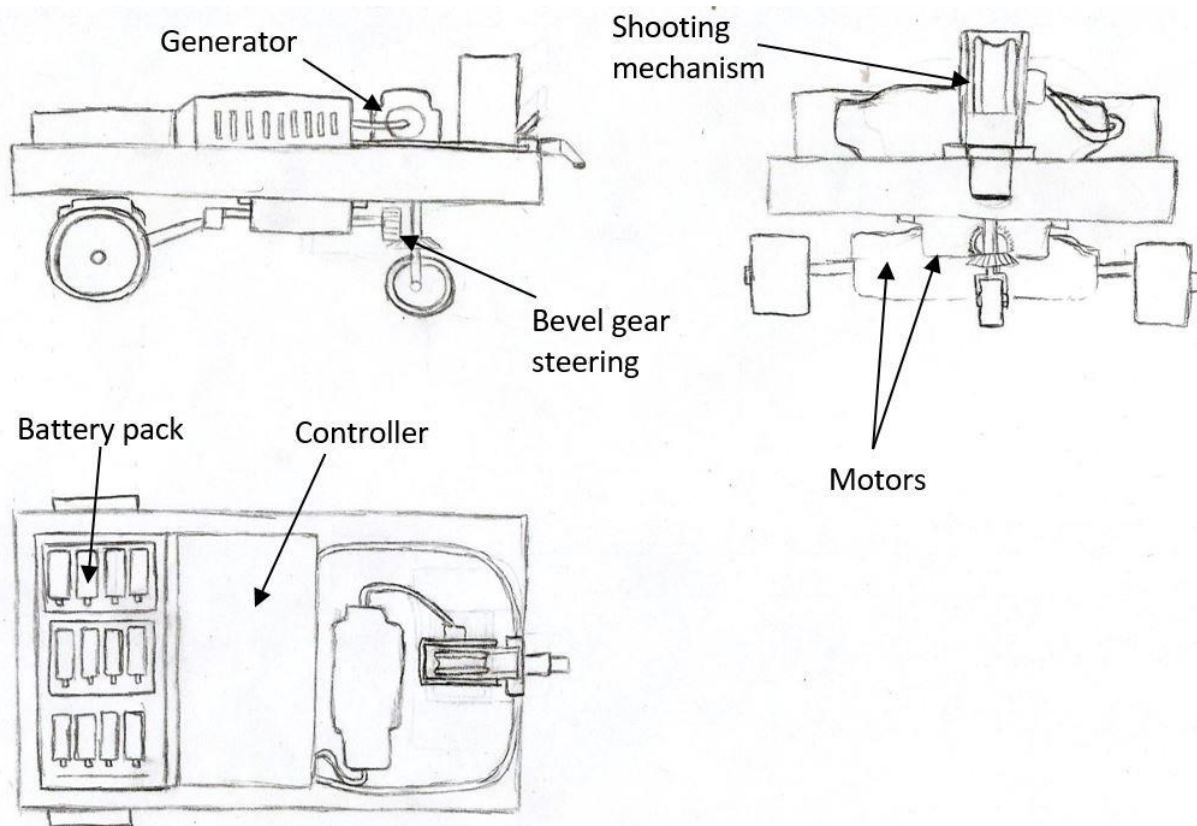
Pitching wheel robot- this design utilizes a motor and wheel shooting mechanism similar to a baseball shooter.
